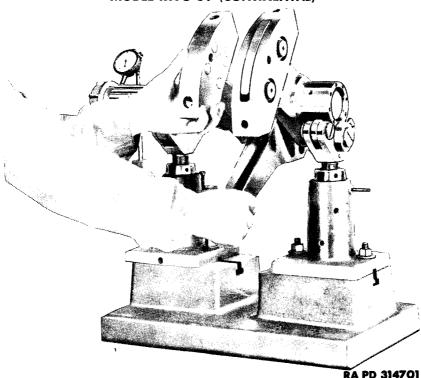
Checking Crankshaft Run-out Using Rollers 41-R-2660 and Indicator 41-I-100
